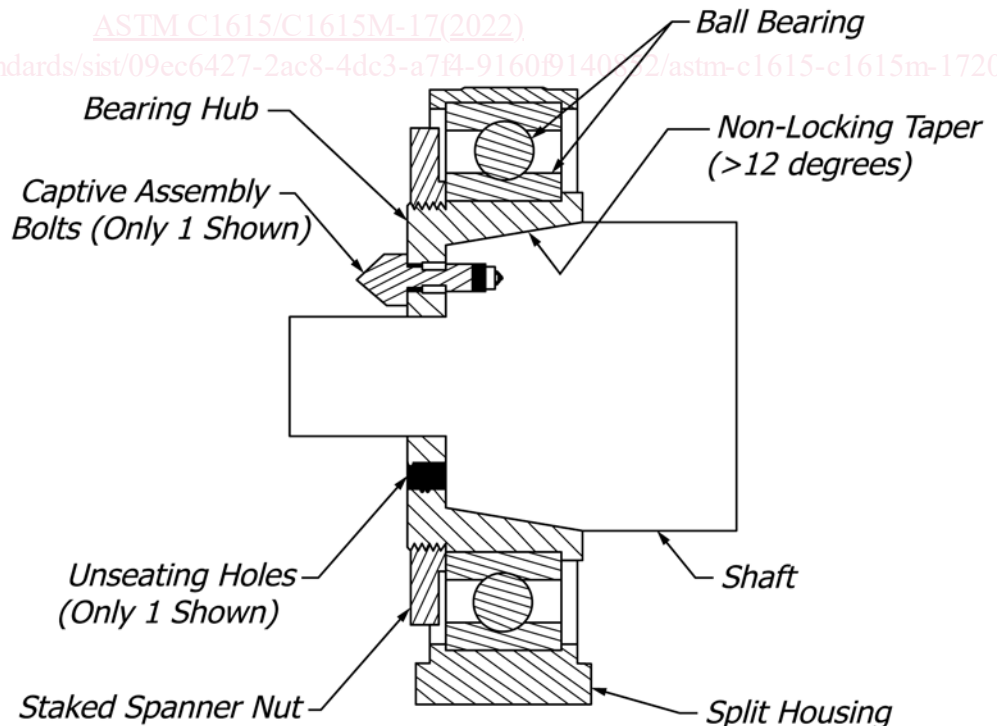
Example of a Large Shaft Mounting For Remote Bearing Replacement
